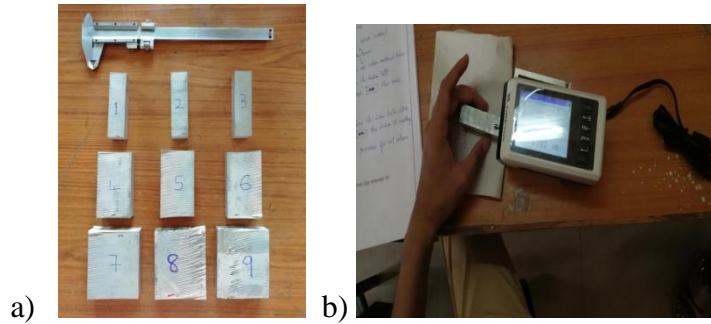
(a) AA 6061 samples cut in AQUAJET AWJM b) The measurement of surface roughness.
